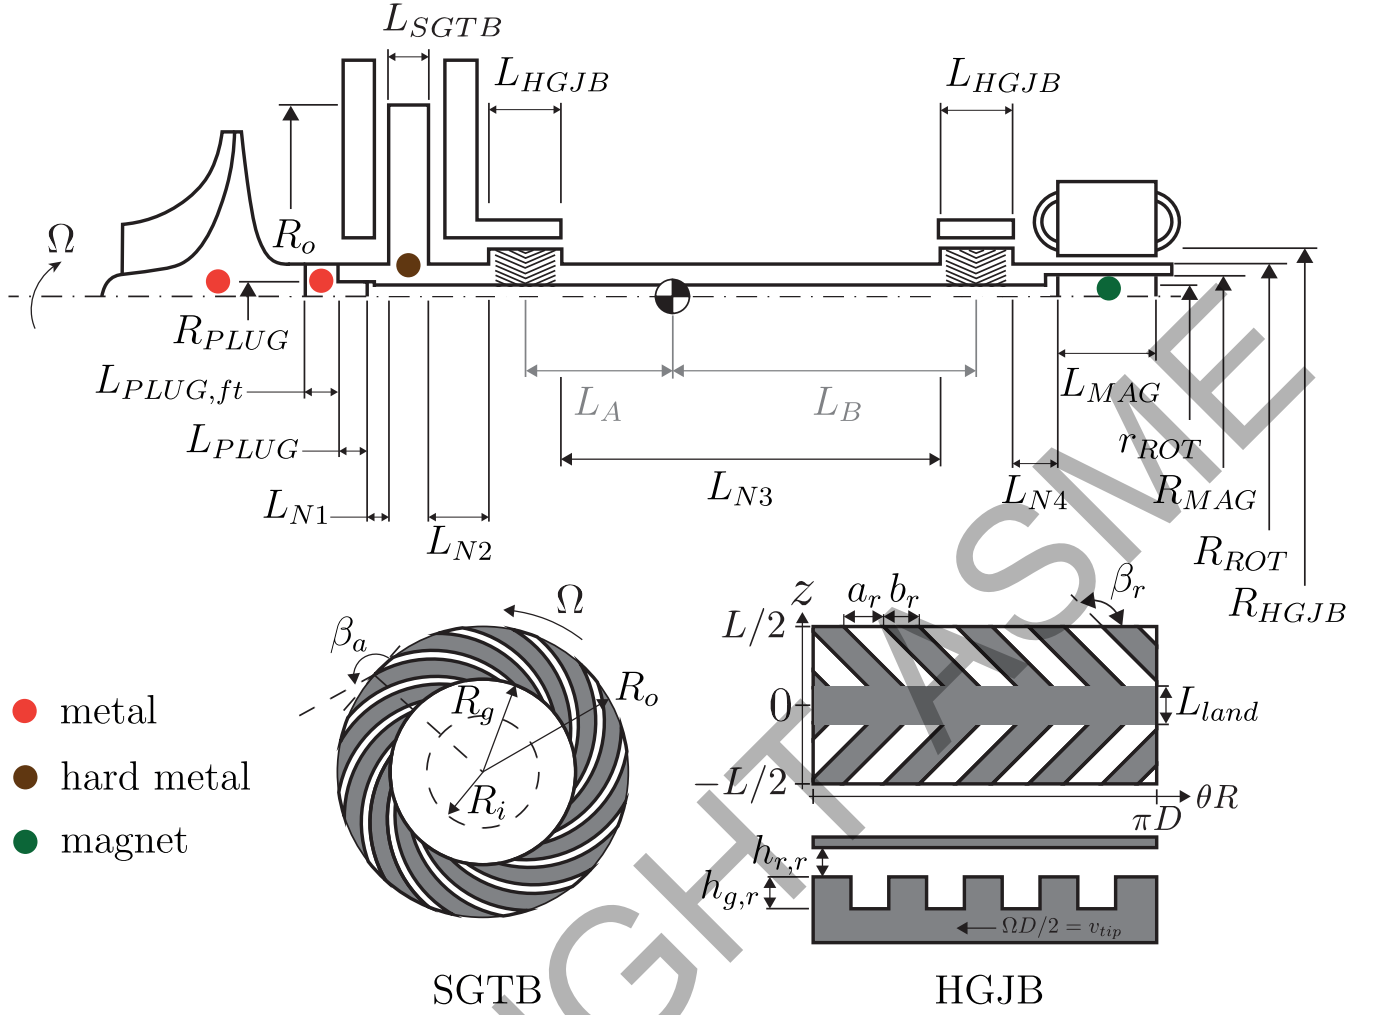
THE COMPLETE TURBOCOMPRESSOR UNIT WITH ALL GEOMETRIC VARIABLES USED IN OPTIMIZATION, INCLUDING LENGTHS AND RADII, AND MATERIALS SPECIFIED. THE SCHEMATIC DIAGRAMS OF THE SPIRAL GROOVE THRUST BEARINGS (SGTB) AND HERRINGBONE GROOVED JOURNAL BEARINGS (HGJB) ARE SHOWN WITH THEIR RESPECTIVE VARIABLES. THE LAYOUT OF THE SUBSYSTEMS FOLLOWS THE 'CSABE' PERMUTATION.
